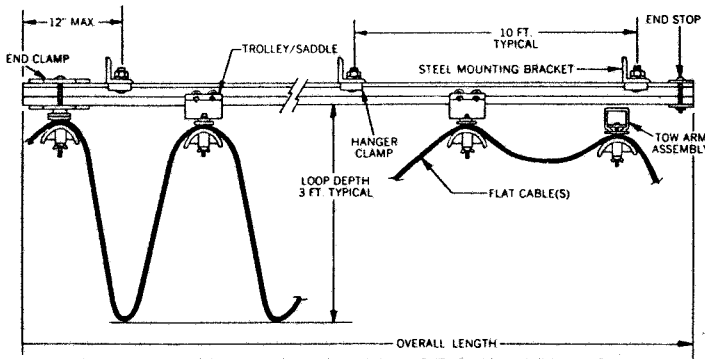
STANDARD METHOD OF SUPPORTING TRACK USING HANGER CLAMPS
